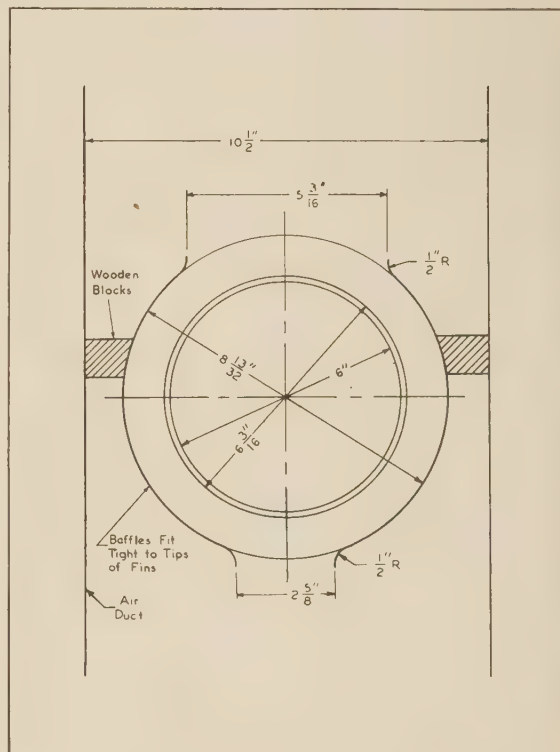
PLAN VIEW OF FIN-AND-BAFFLE ARRANGEMENT
